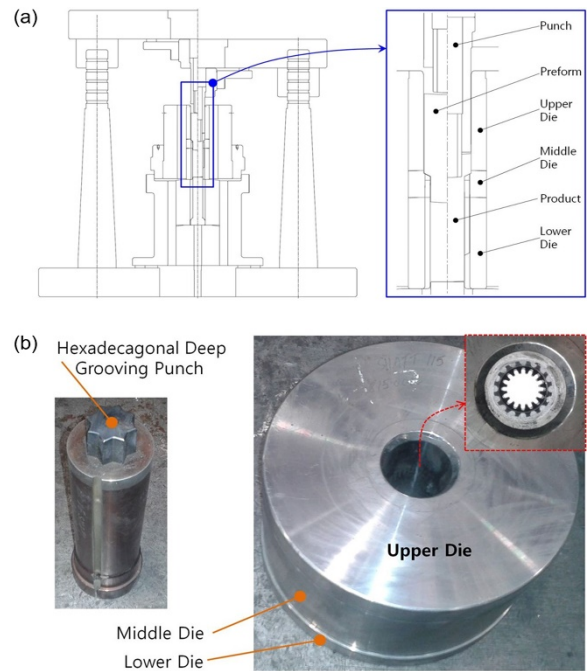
Forging punch and combined extrusion die assembly for drive shaft manufacturing: (a) tool structure and its assembly; (b) fabricated forging punch and die assembly.
